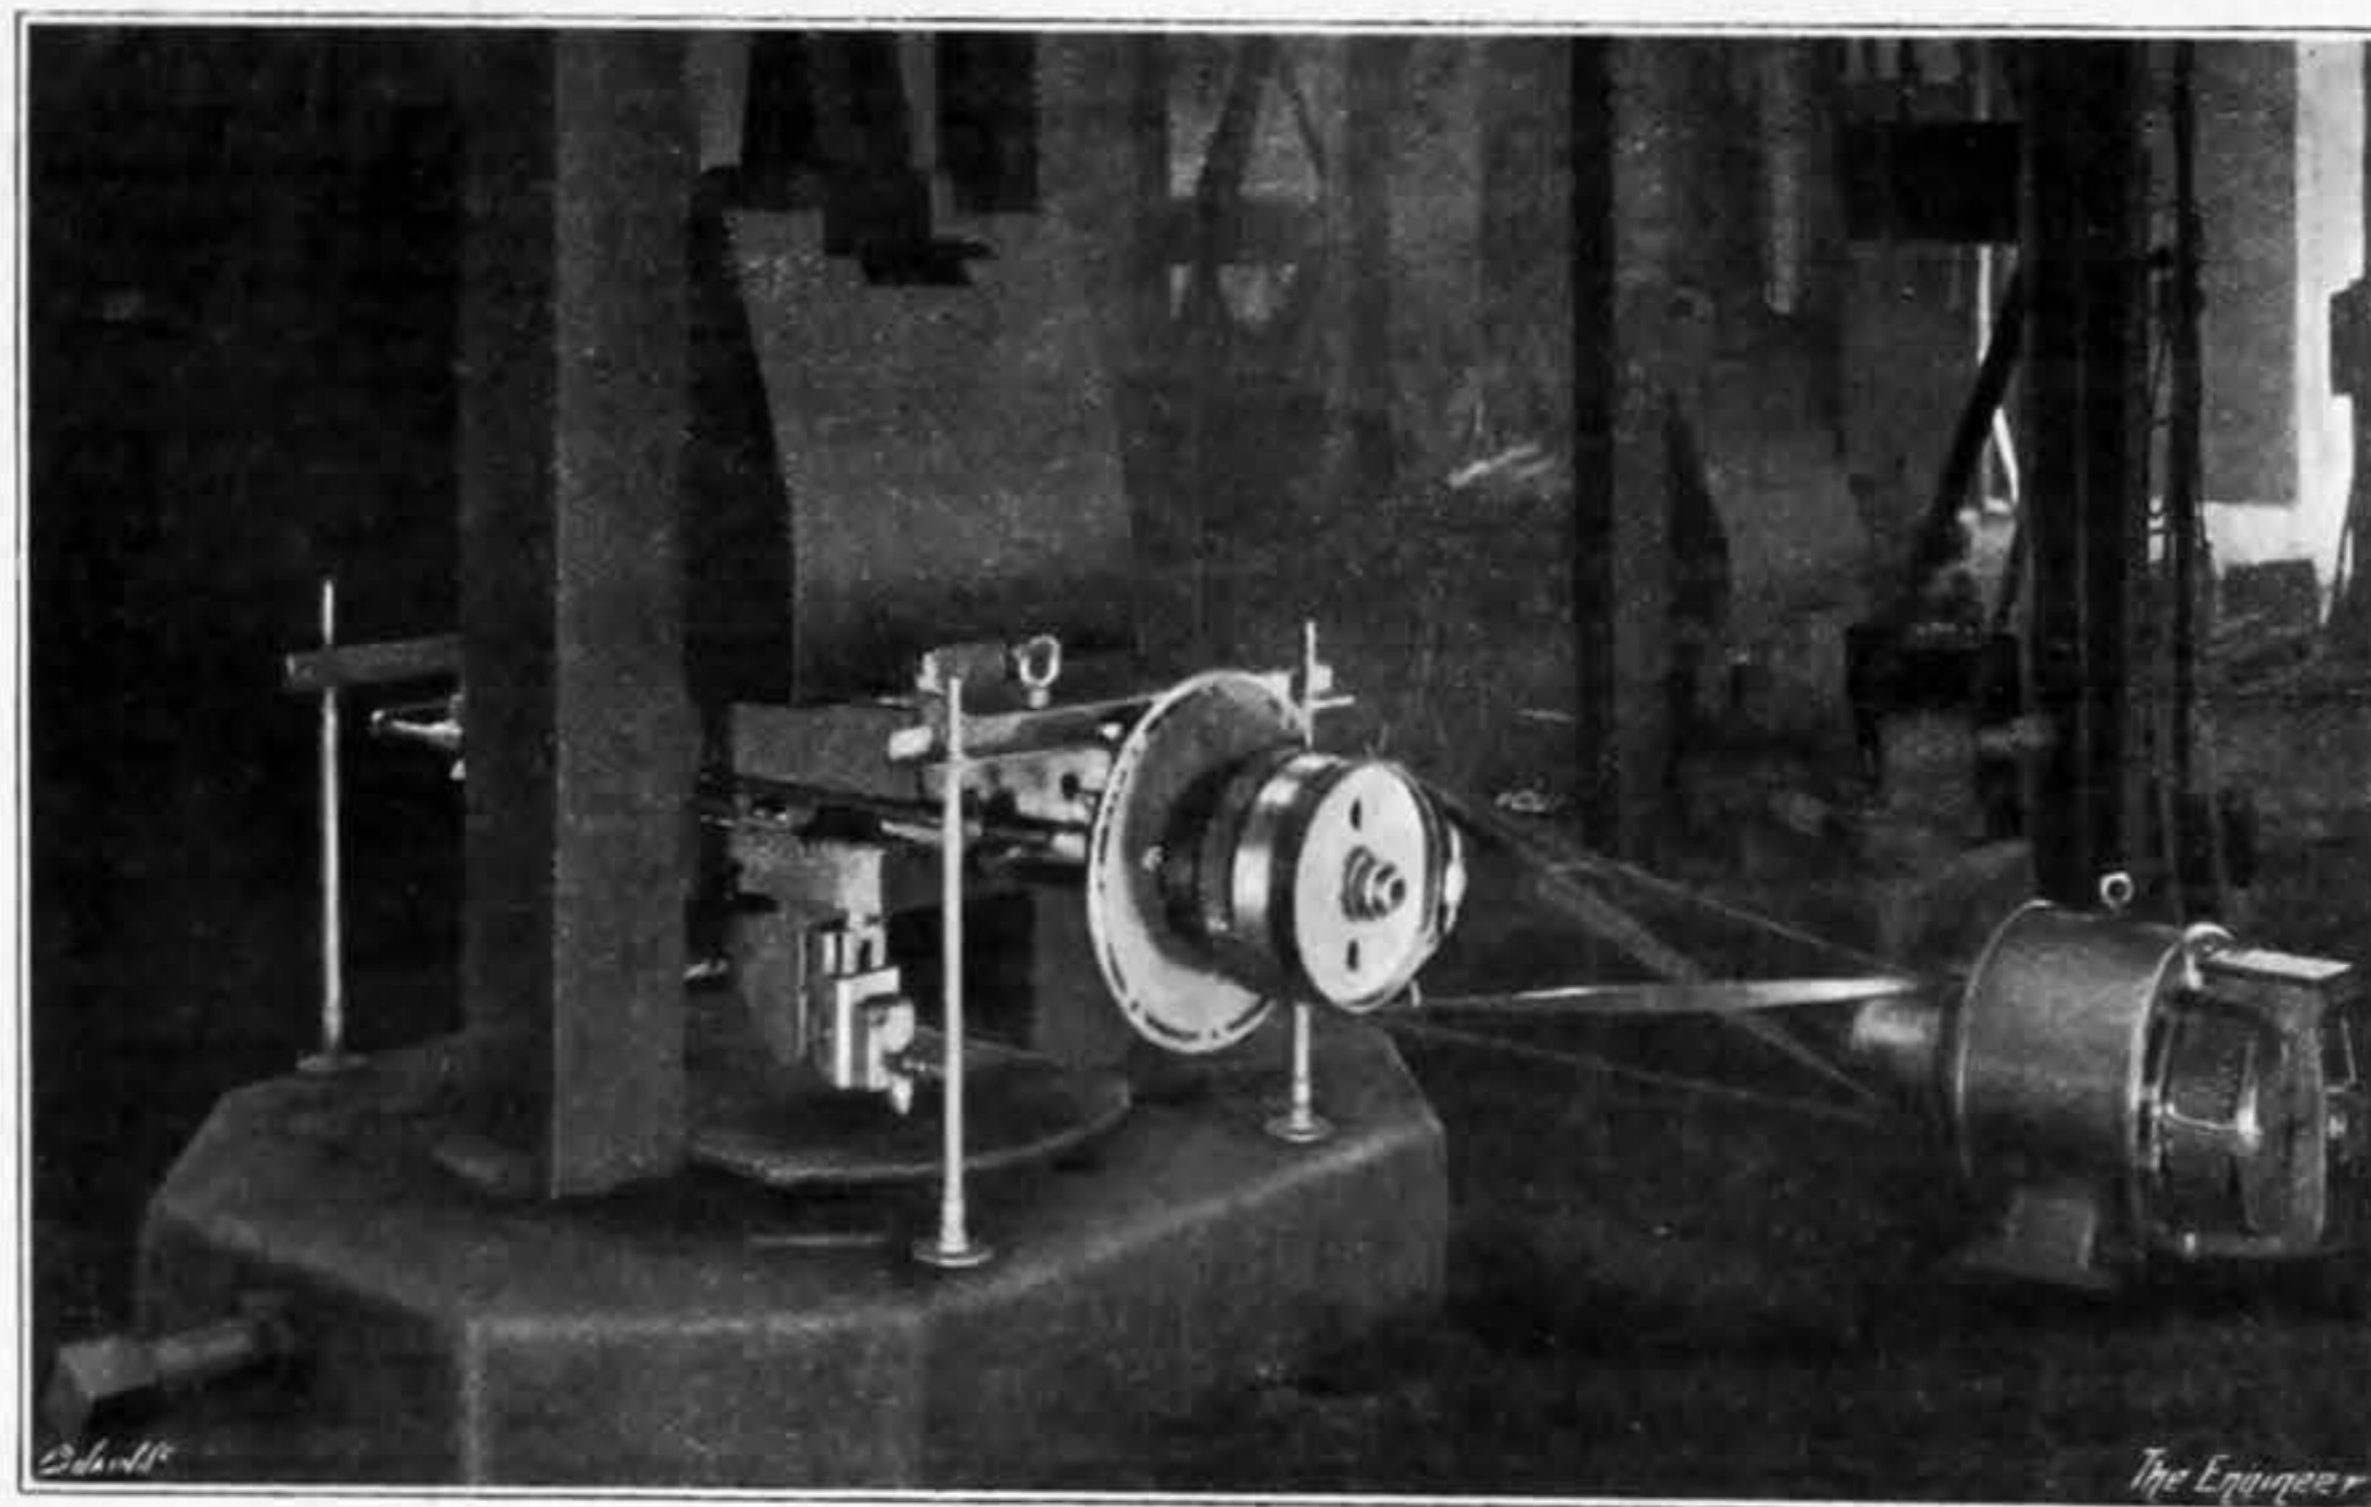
PORTABLE PLANE MACHINING DROP STAMP BLOCK
